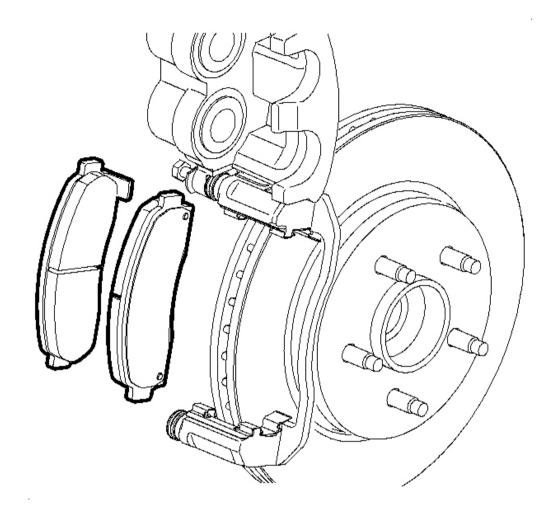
Removing/Installing Brake Pads From Brake Caliper Bracket Courtesy of GENERAL MOTORS CORP.
